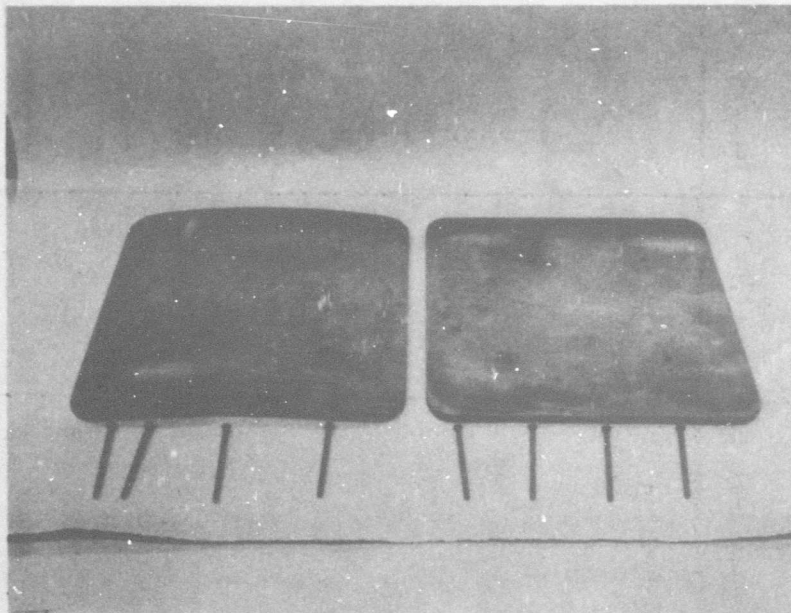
DOWNSIDE OF HEAT SHIELD PANELS COATED WITH WSi_2 (LEFT) AND MoSi_2 (RIGHT) SHOWING MOTTLED APPEARANCE OF COATING INCLUDED ARE COLUMBIUM (D36) BOLTS COATED WITH WSi_2 TO BE USED FOR ATTACHMENT OF PANEL TO TEST FIXTURE
